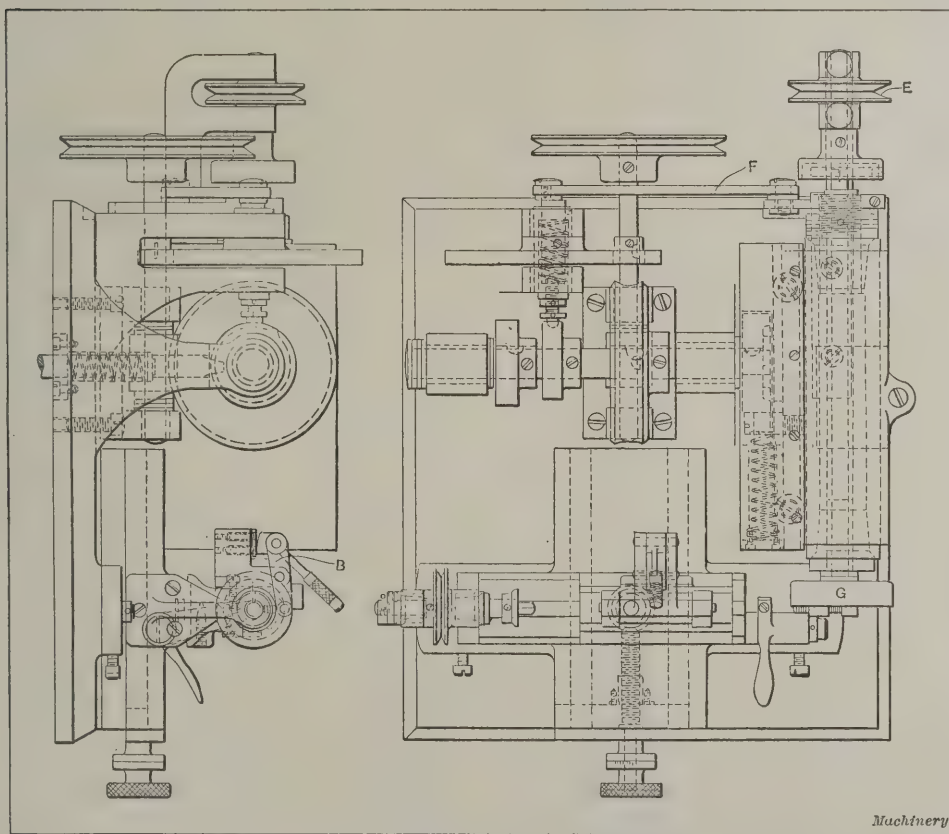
Construction of the McGinty Staff Cone Grinding and Polishing Machine shown in Fig. 36
